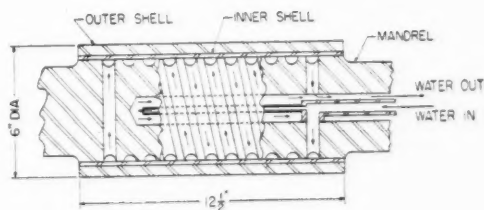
Commercial spiral-grooved mill roll with improved heat-transfer characteristics
